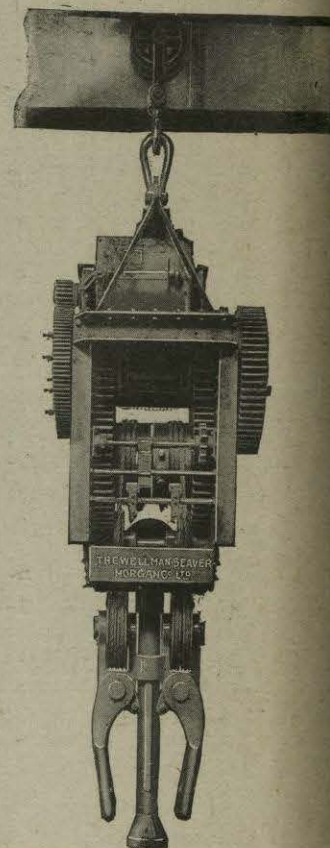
Sketch showing Details of Ingot Stripper Attachment.
